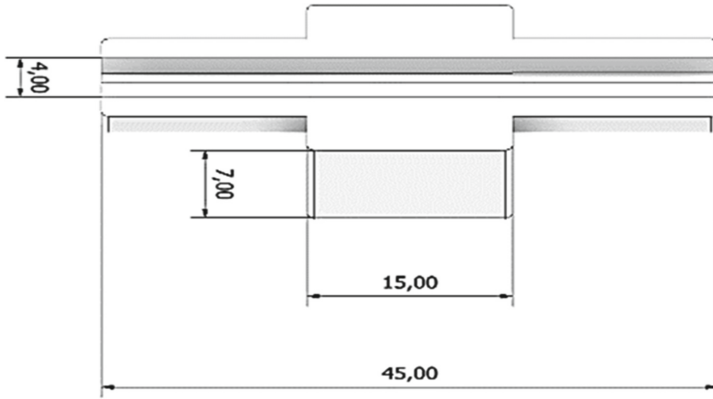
The three-dimensional design of the connector is composed of two symmetrical parts, to obtain the sample with flat internal surfaces, and to perform exposures to O₃, UV, and ozonized water.
